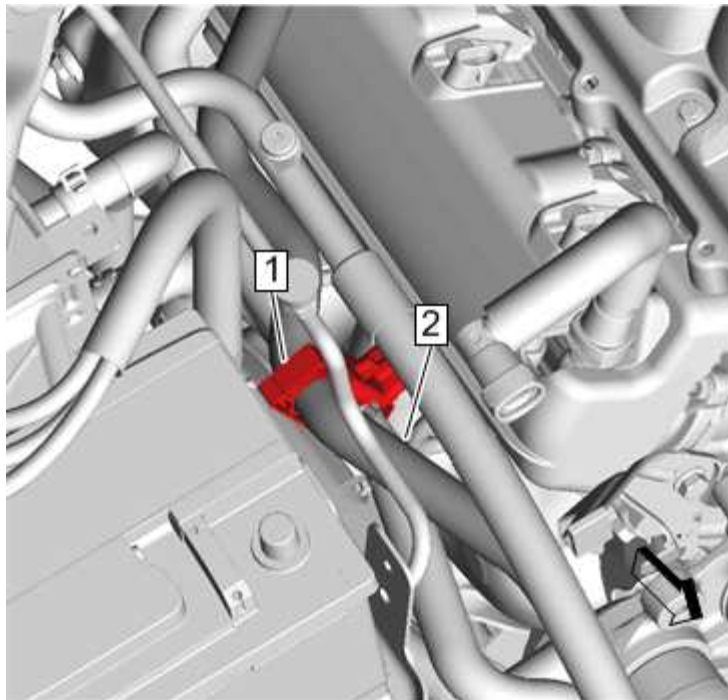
Heater Inlet HoseAt Heater Inlet and Outlet Hose Bracket
